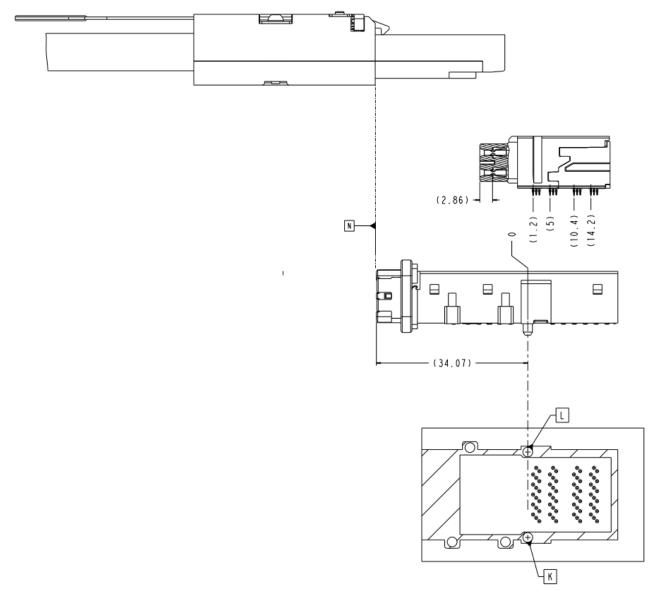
Cage, X8 Through-Hole Connector, Module Alignment
